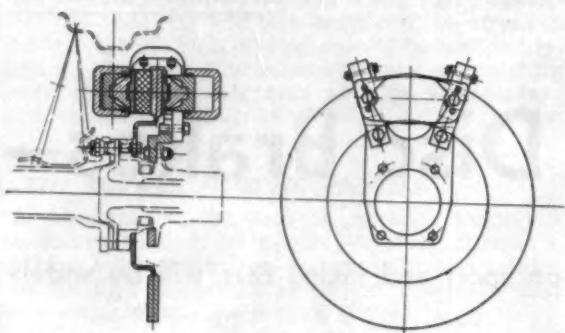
Segmental pad caliper for passenger cars has forged steel stirrups with bolted-on light alloy cylinders and segmental linings bonded to steel-backed plates. Lining pad on right-hand side is shown in fully worn position, while pad on the left side is new.
